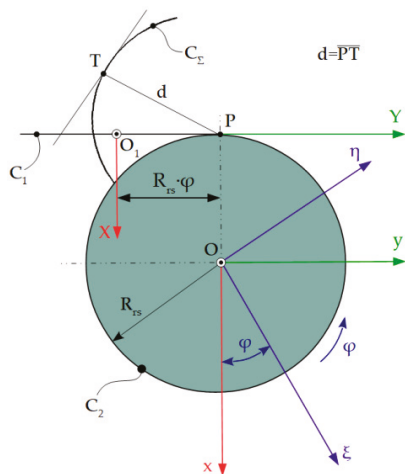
The minimum distance method applied at generating with rotary cutter tool [2].
